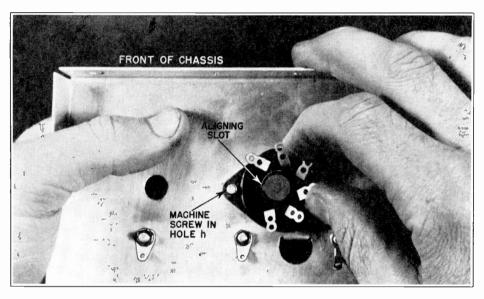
Method of mounting the tube socket on the chassis. The terminal lugs of the socket should be underneath the chassis, and the aligning slot should be at the left (near hole h) when the chassis is held as shown in this illustration. Hold the machine screw in position with a finger of your left hand.
